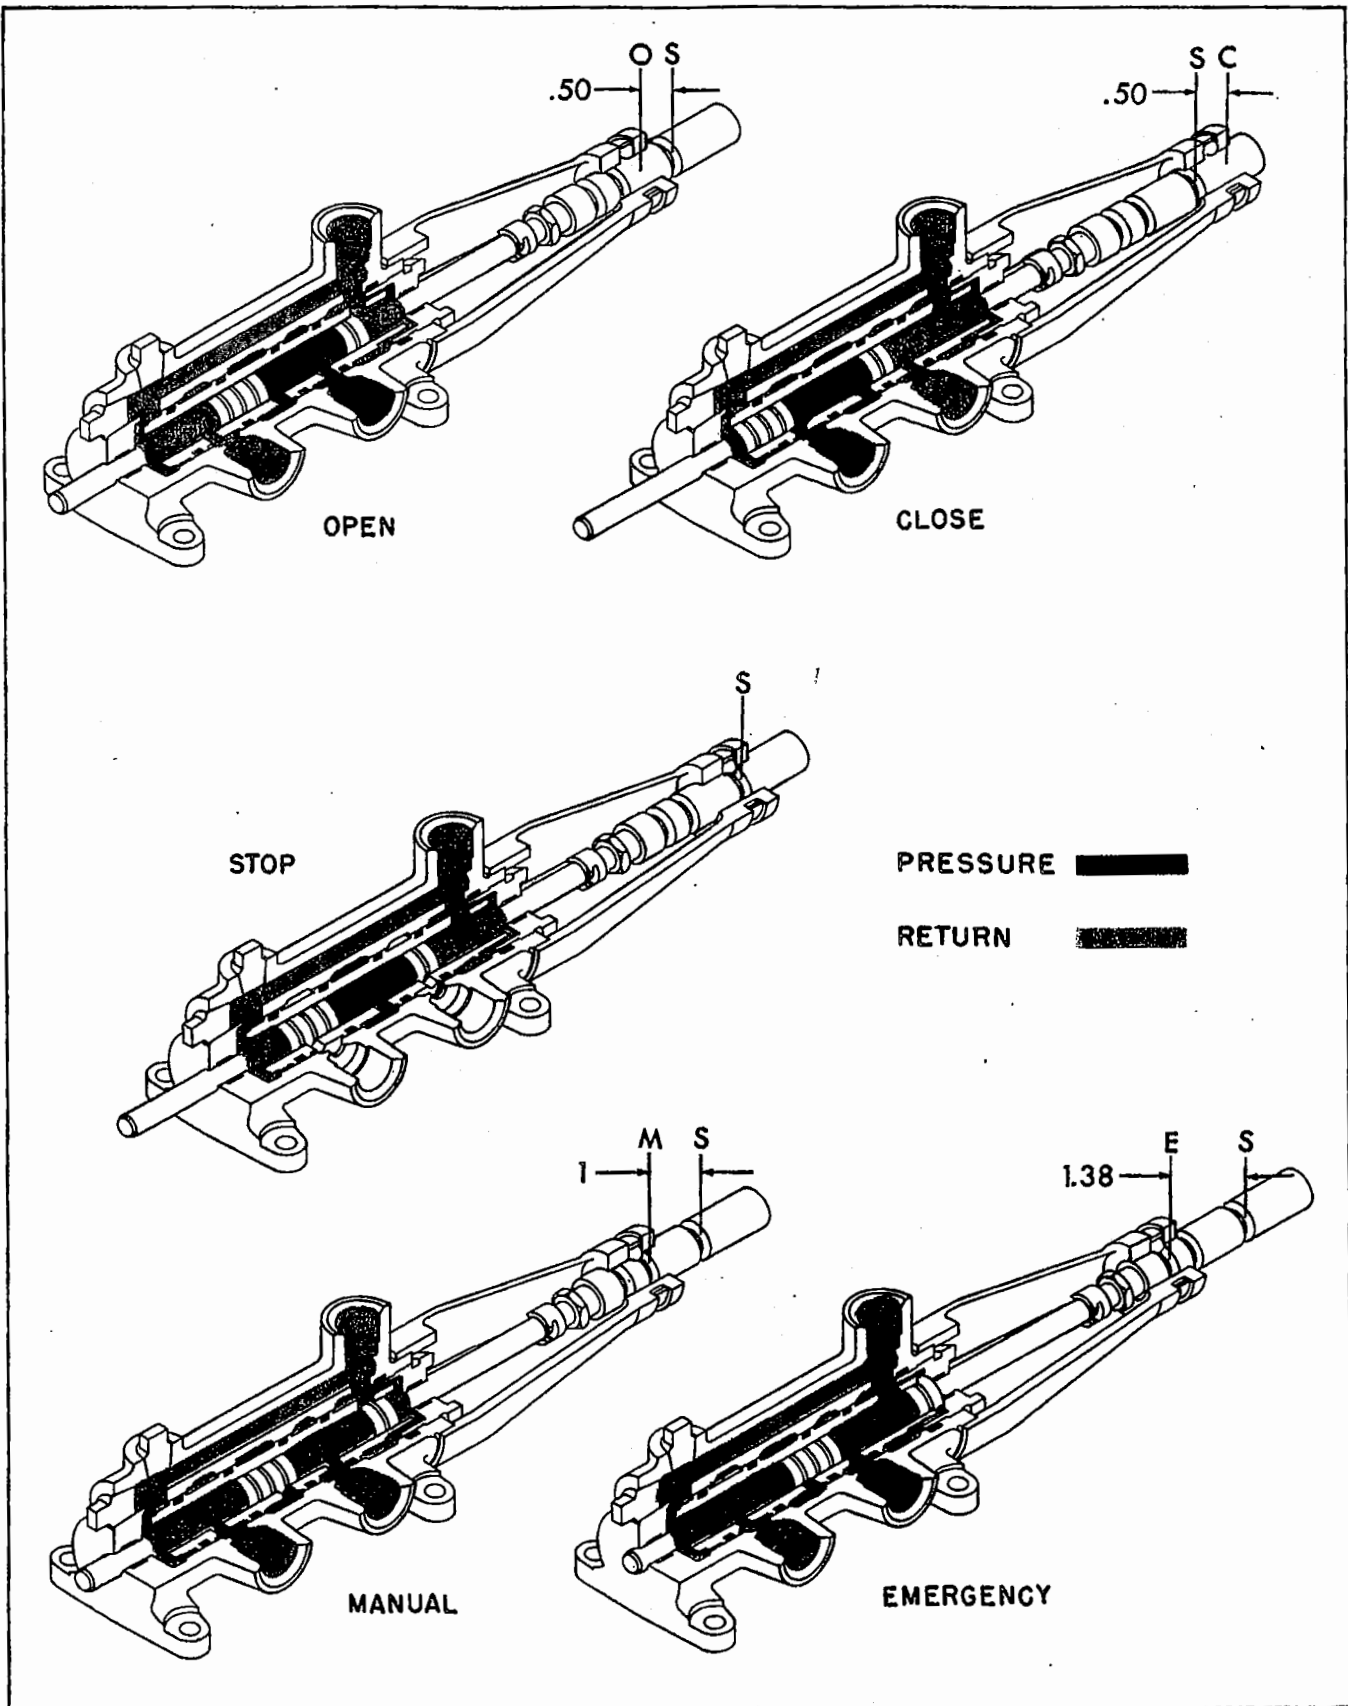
(Sheet 2 of 2 Sheets). Canopy Control Valve.
